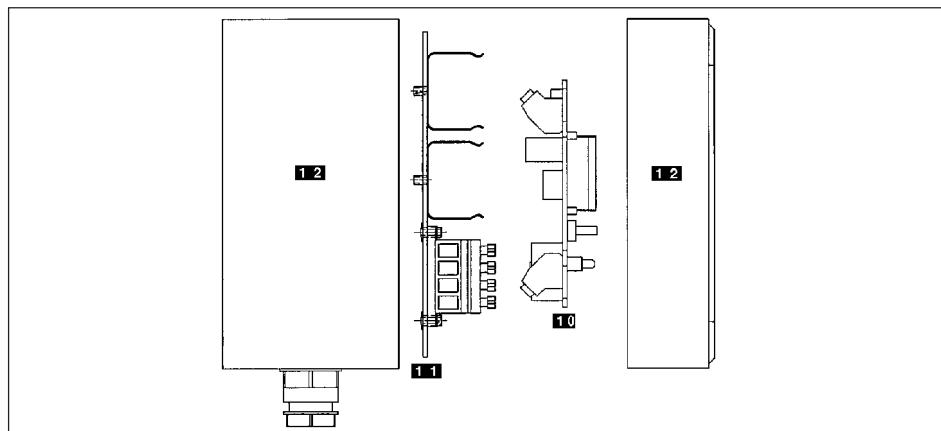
Spare Parts Explosion Drawing wall-mount version
